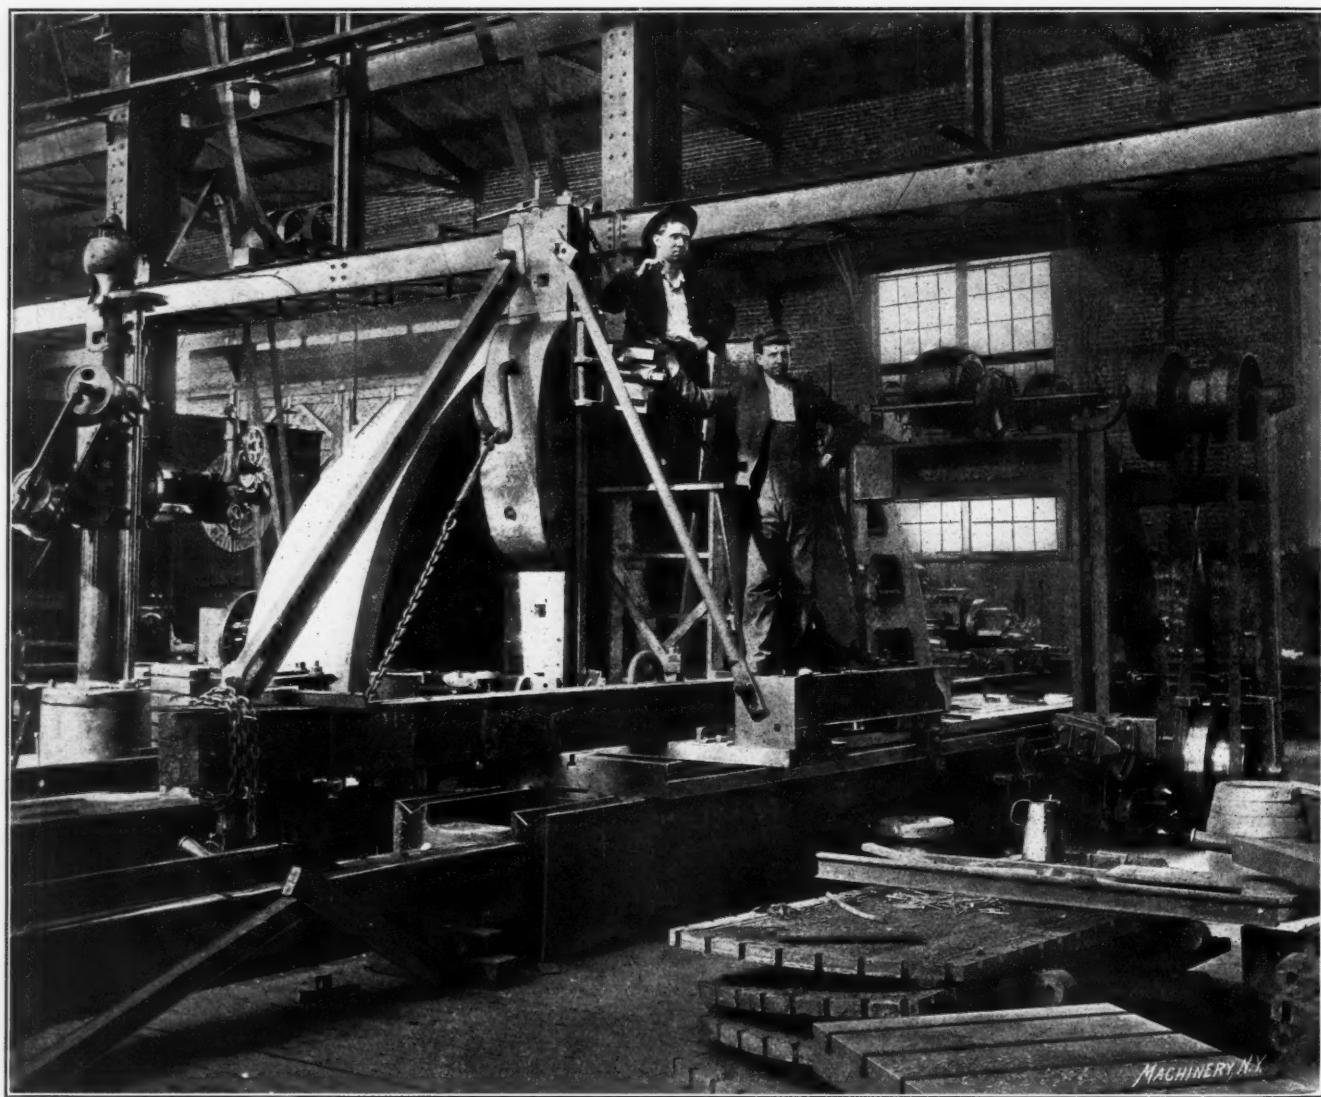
View showing how the Large Casting Illustrated in Fig. 2 was planed on a 4-foot Planer.
